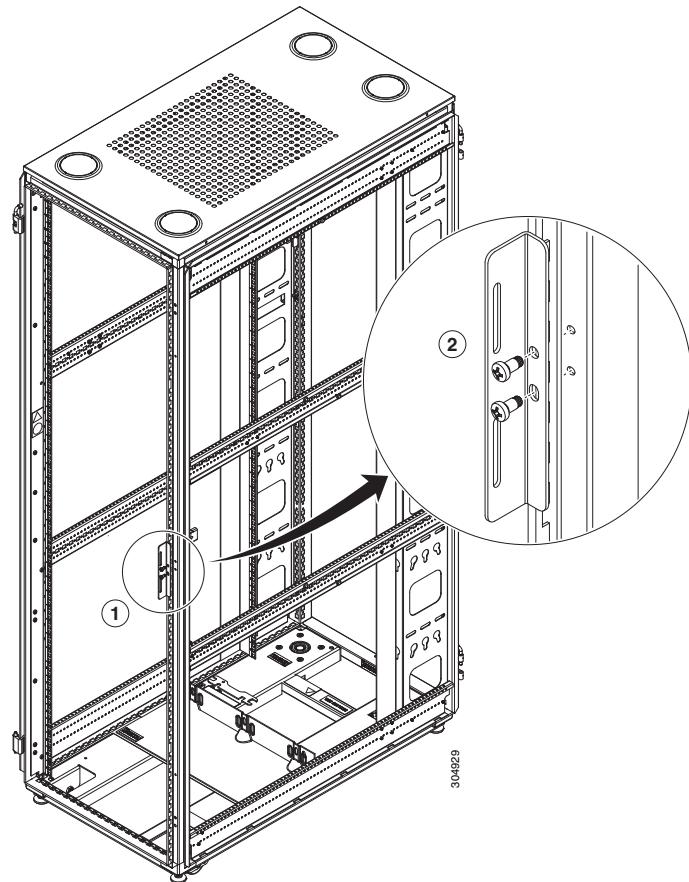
Reversing Front Door Hinges and Door Latch
